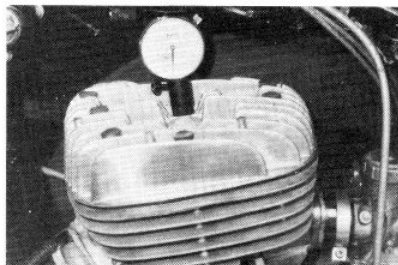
To measure piston travel, install a dial indicator (such as Central Tool Co. indicator shown) in spark plug hole. Find TDC, then move piston by rotating crankshaft until ignition timing is correct. Refer to Fig. 13 if spark plug hole is not parallel to cylinder bore centerline.
